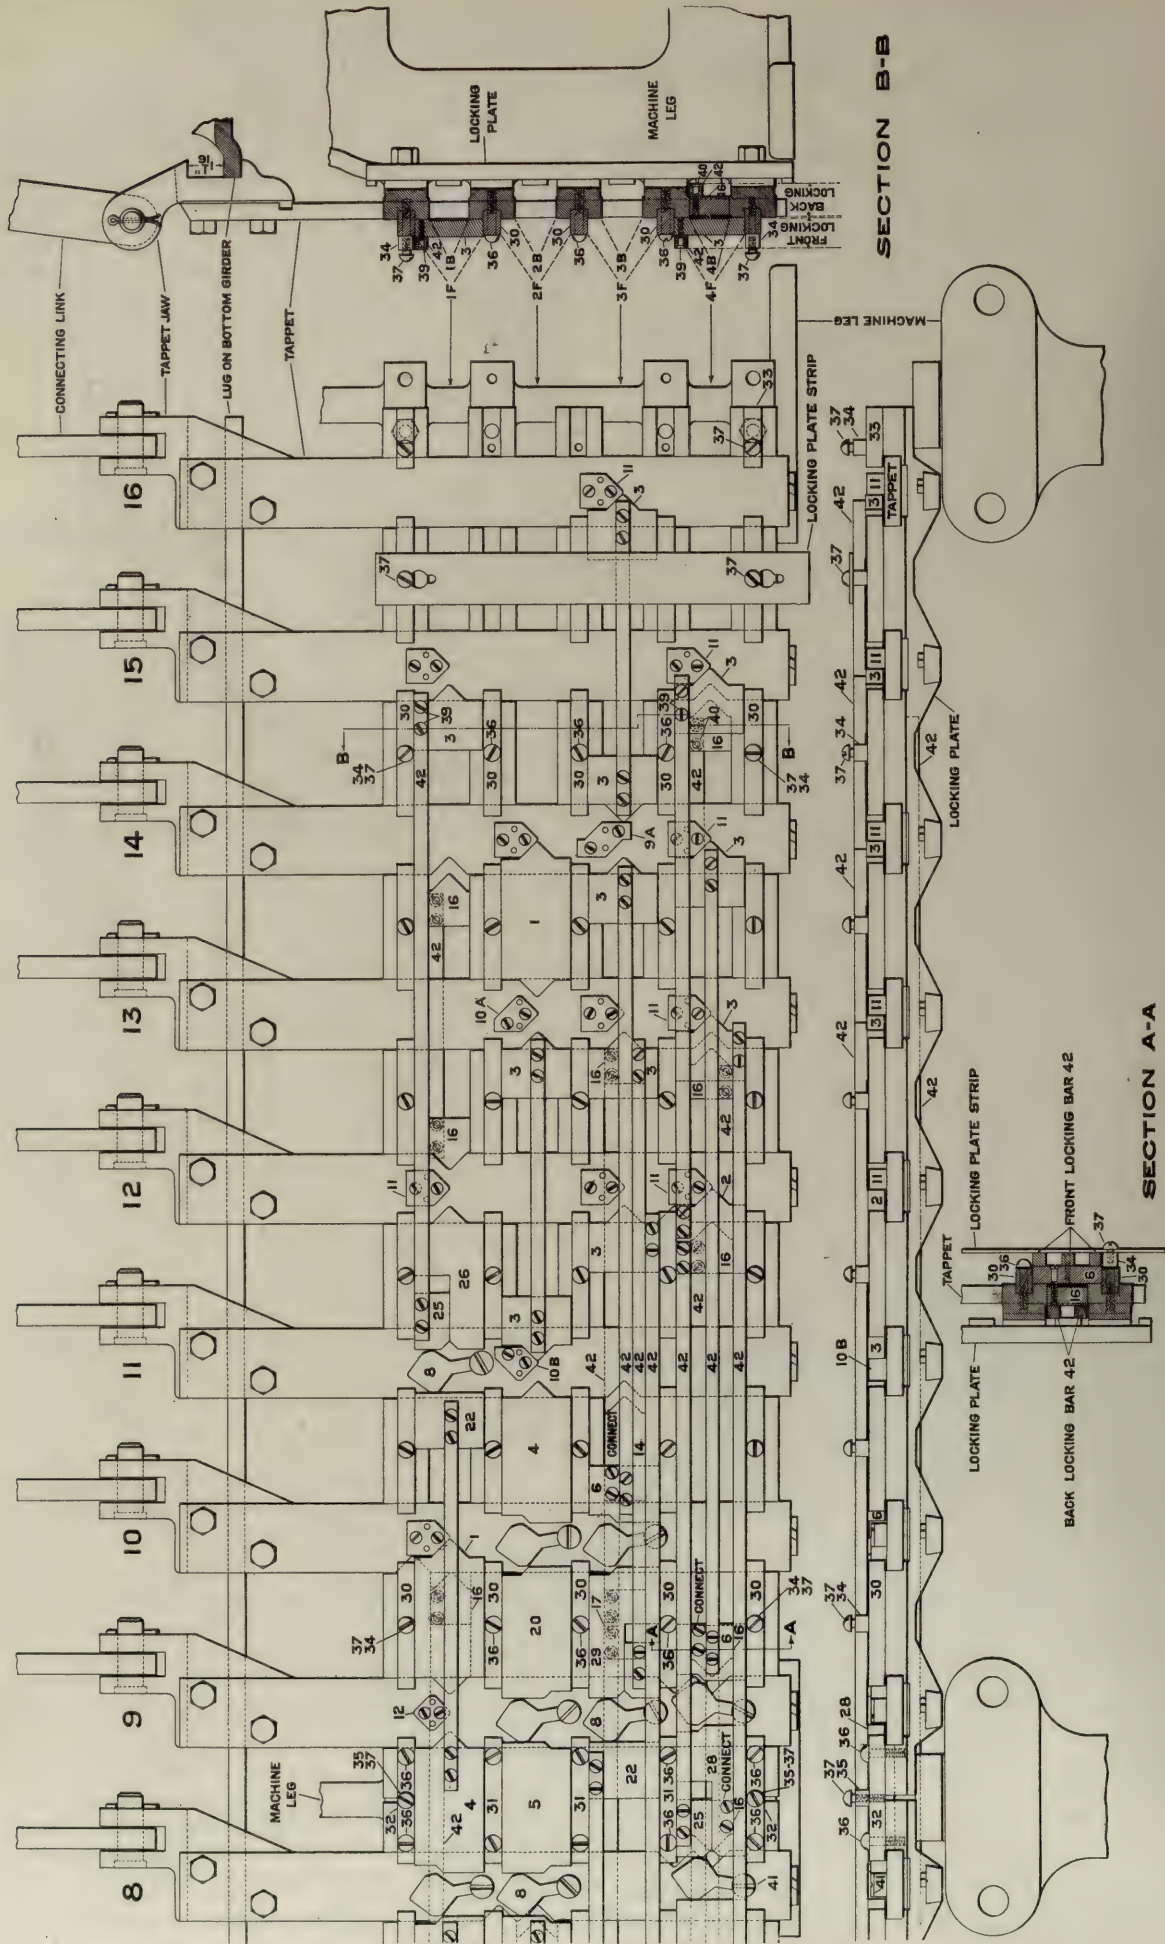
Standard Interlocking Machine; Details of Latch Block.
